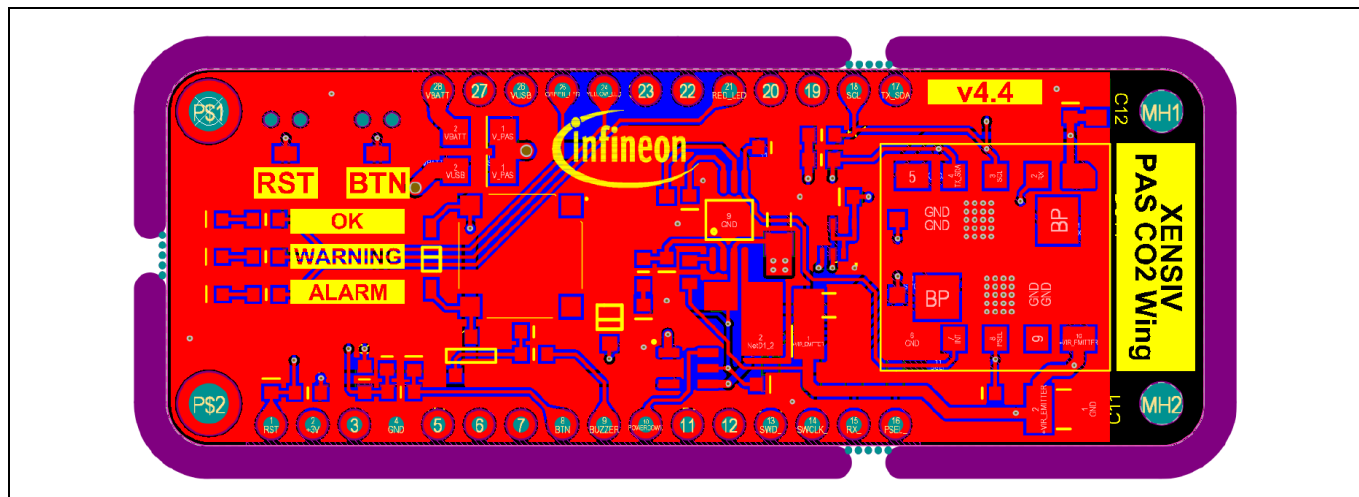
PCB layout of XENSIV™ PASCO2V15 Wing board
